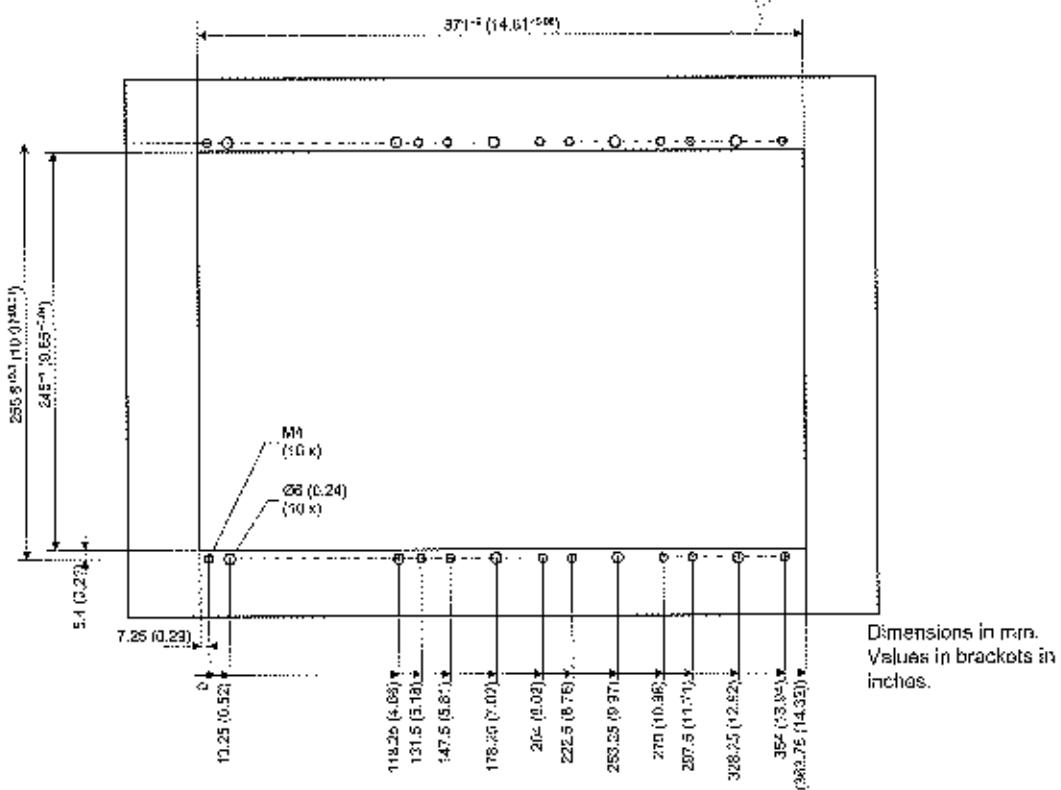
Cut-Out Widths and Drilling Pattern - 5/6 Device, 1st Device Row
